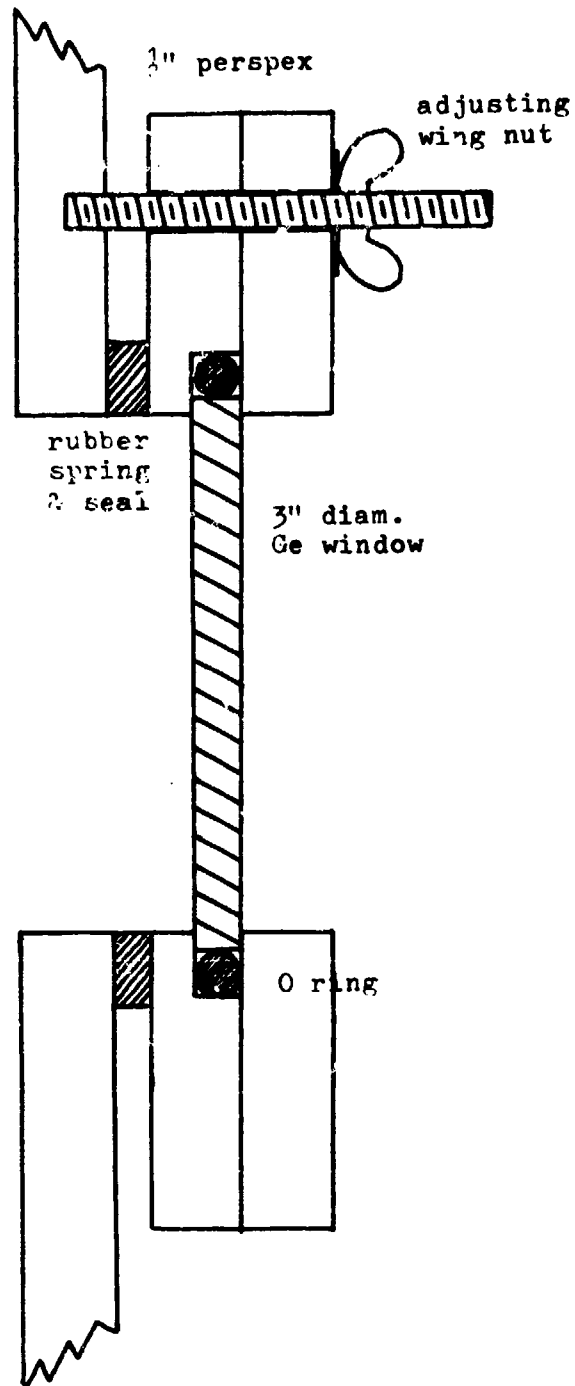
Mounting for reflectors showing thick rubber gasket which is both a gas seal and a spring load for the three adjustment screws.
